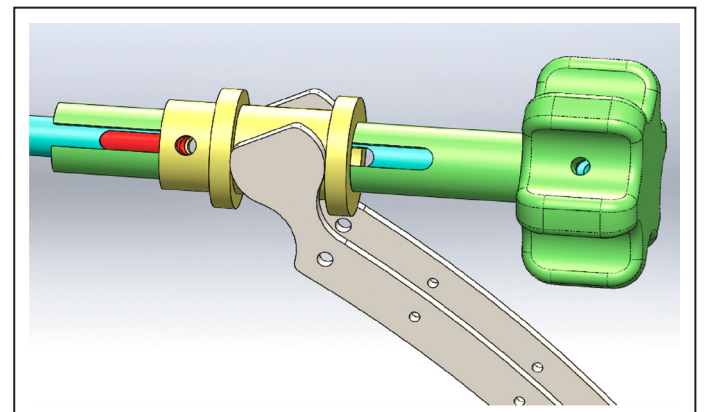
Rotation-translation mechanism including rotation knob (green).
